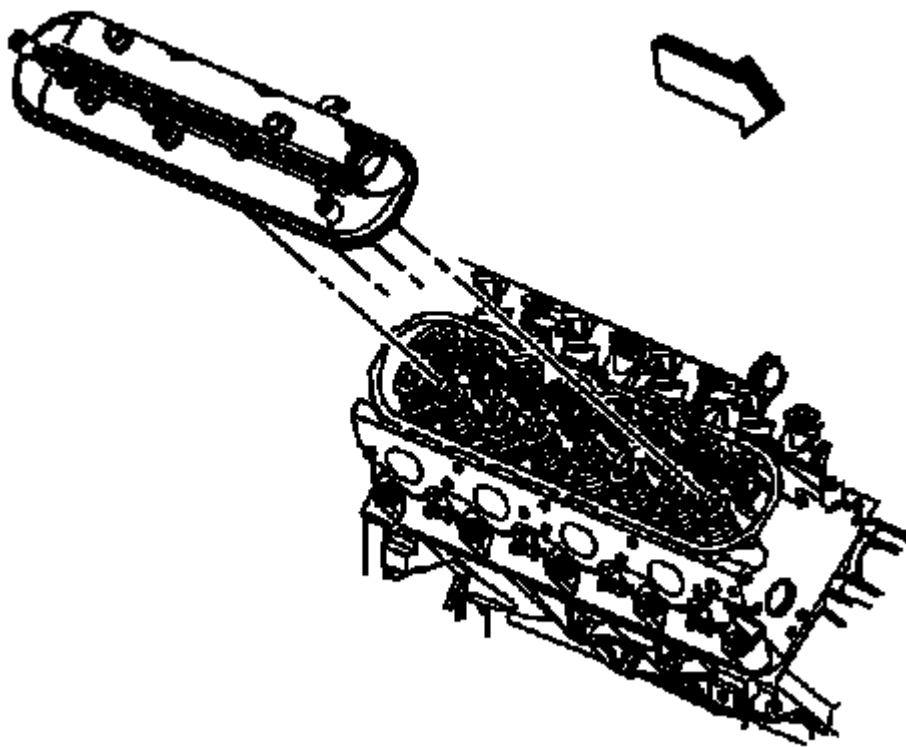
Ignition Coils & BracketCourtesy of GENERAL MOTORS COMPANY
